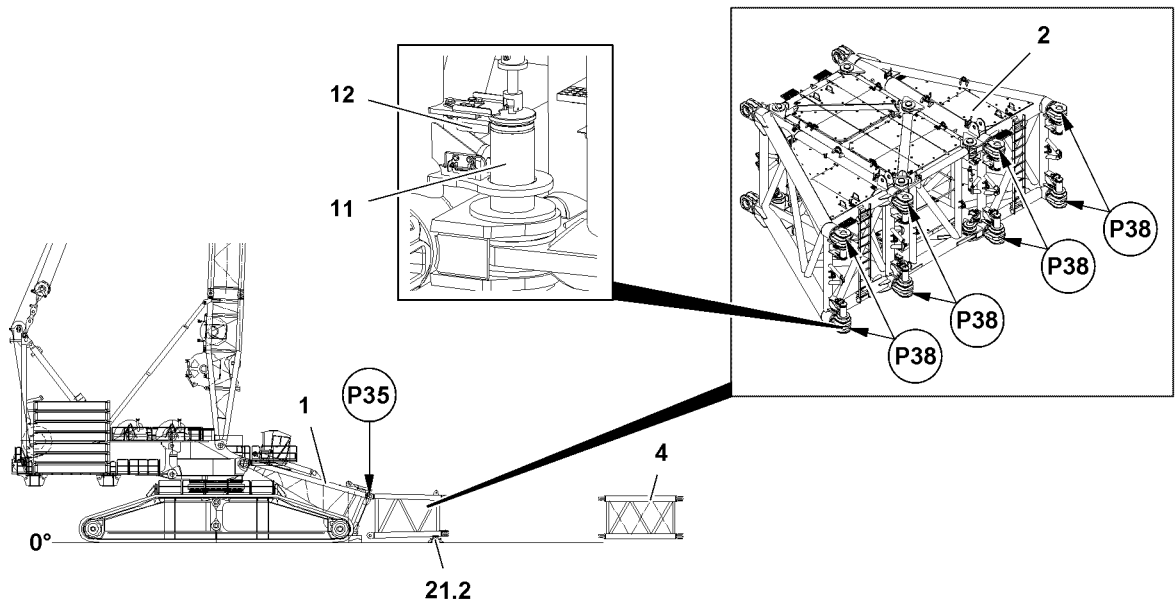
Assembling the Li-intermediate sections on the P-adapter - Pin points
